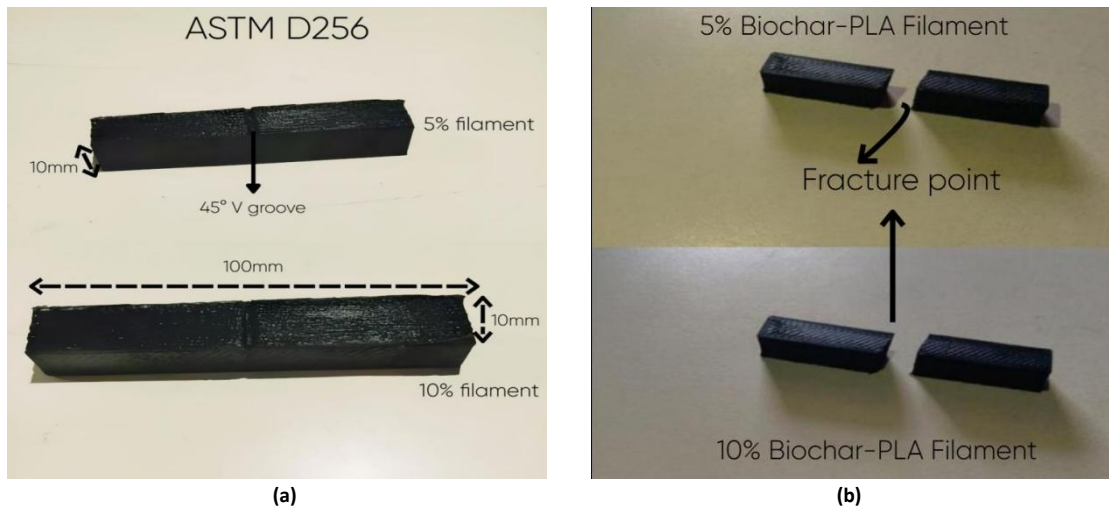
Impact testing specimens (a) Before testing (b) After testing
